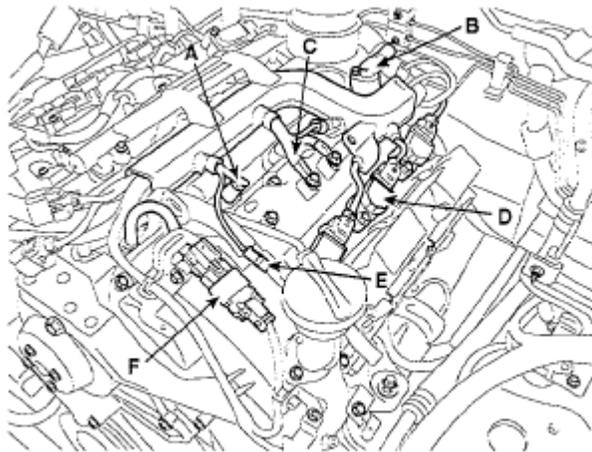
Identifying Breather Hose, Purge Control Solenoid Valve Hose And Cooling Hoses
